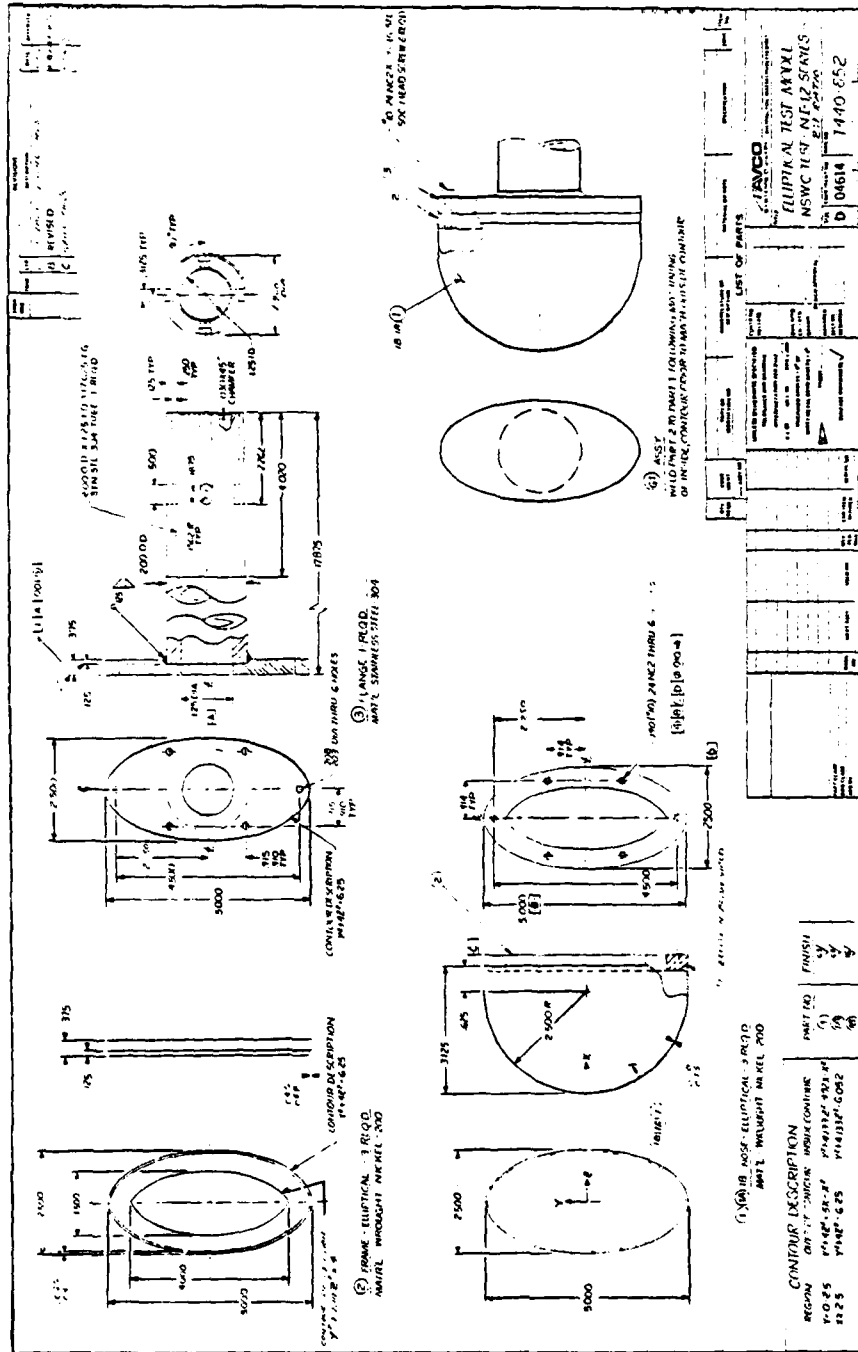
MODEL AND STING ADAPTER DRAWING
